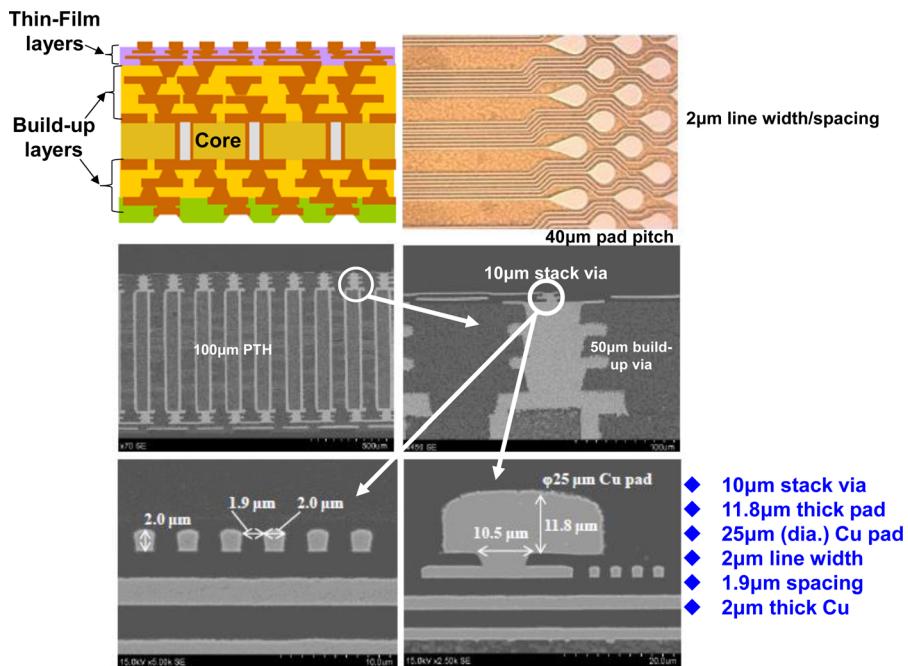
TSV-less interposer—Shinko's i-THOP; a flip chip package substrate with thin-film layers on top of the build-up layer
